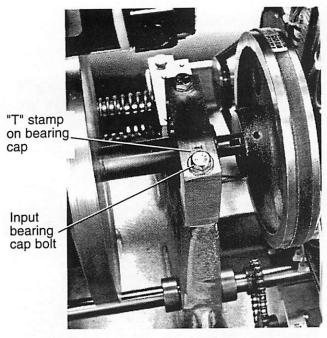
"T" Stamp Shows Bearing Cap Orientation
